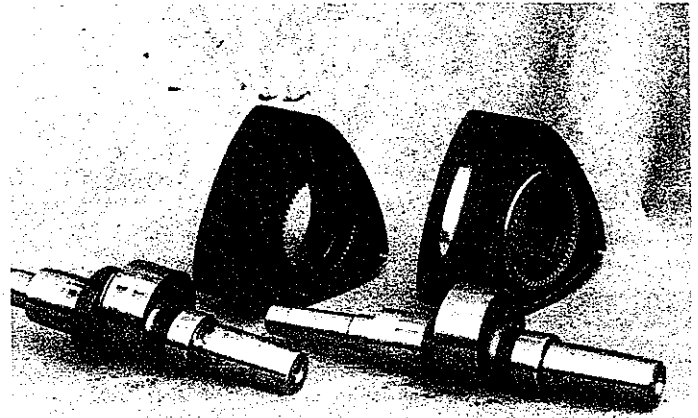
Rotors and crankshafts for the single rotor, heavy fuel (left) and gasoline engines (right)
